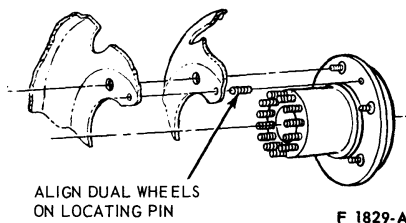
Dual Wheel Radial Alignment to Hub (E-300, F-350)
